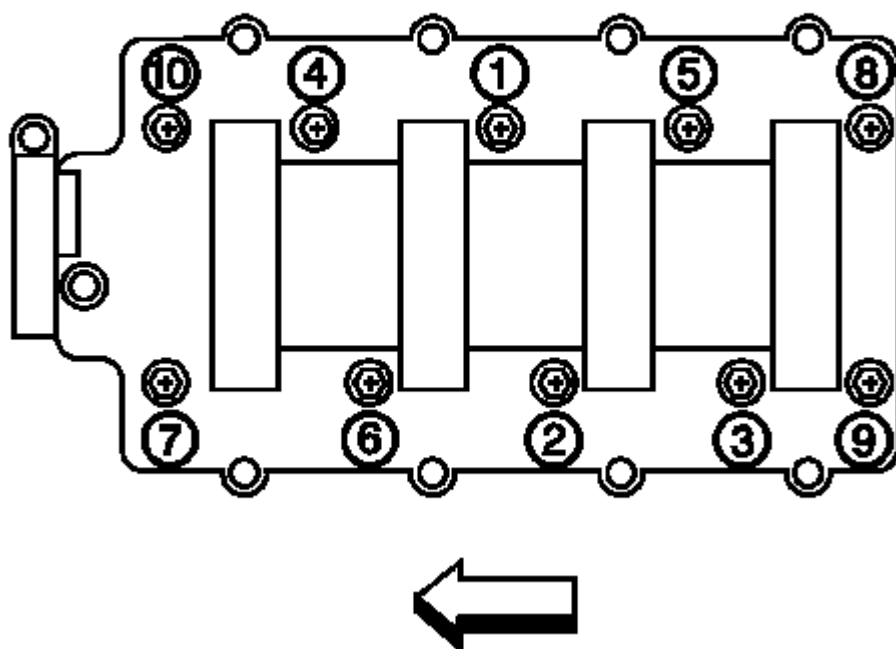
Identifying Intake Manifold Bolt Tightening Sequence
